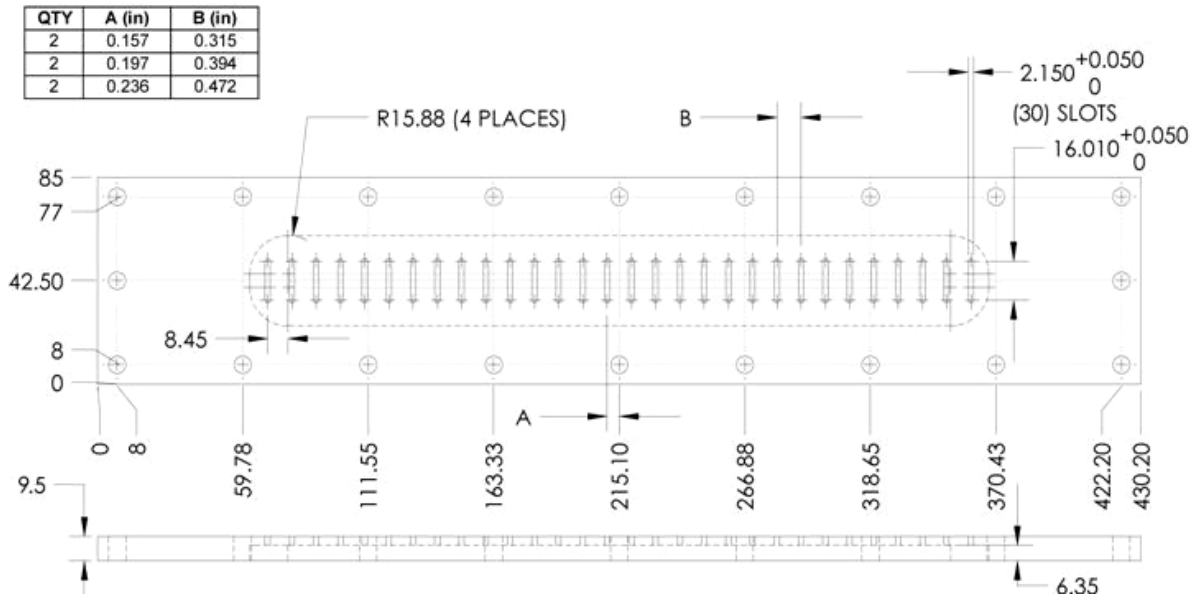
Drawing of Thick Top Cover, with Dimensions in millimeters
